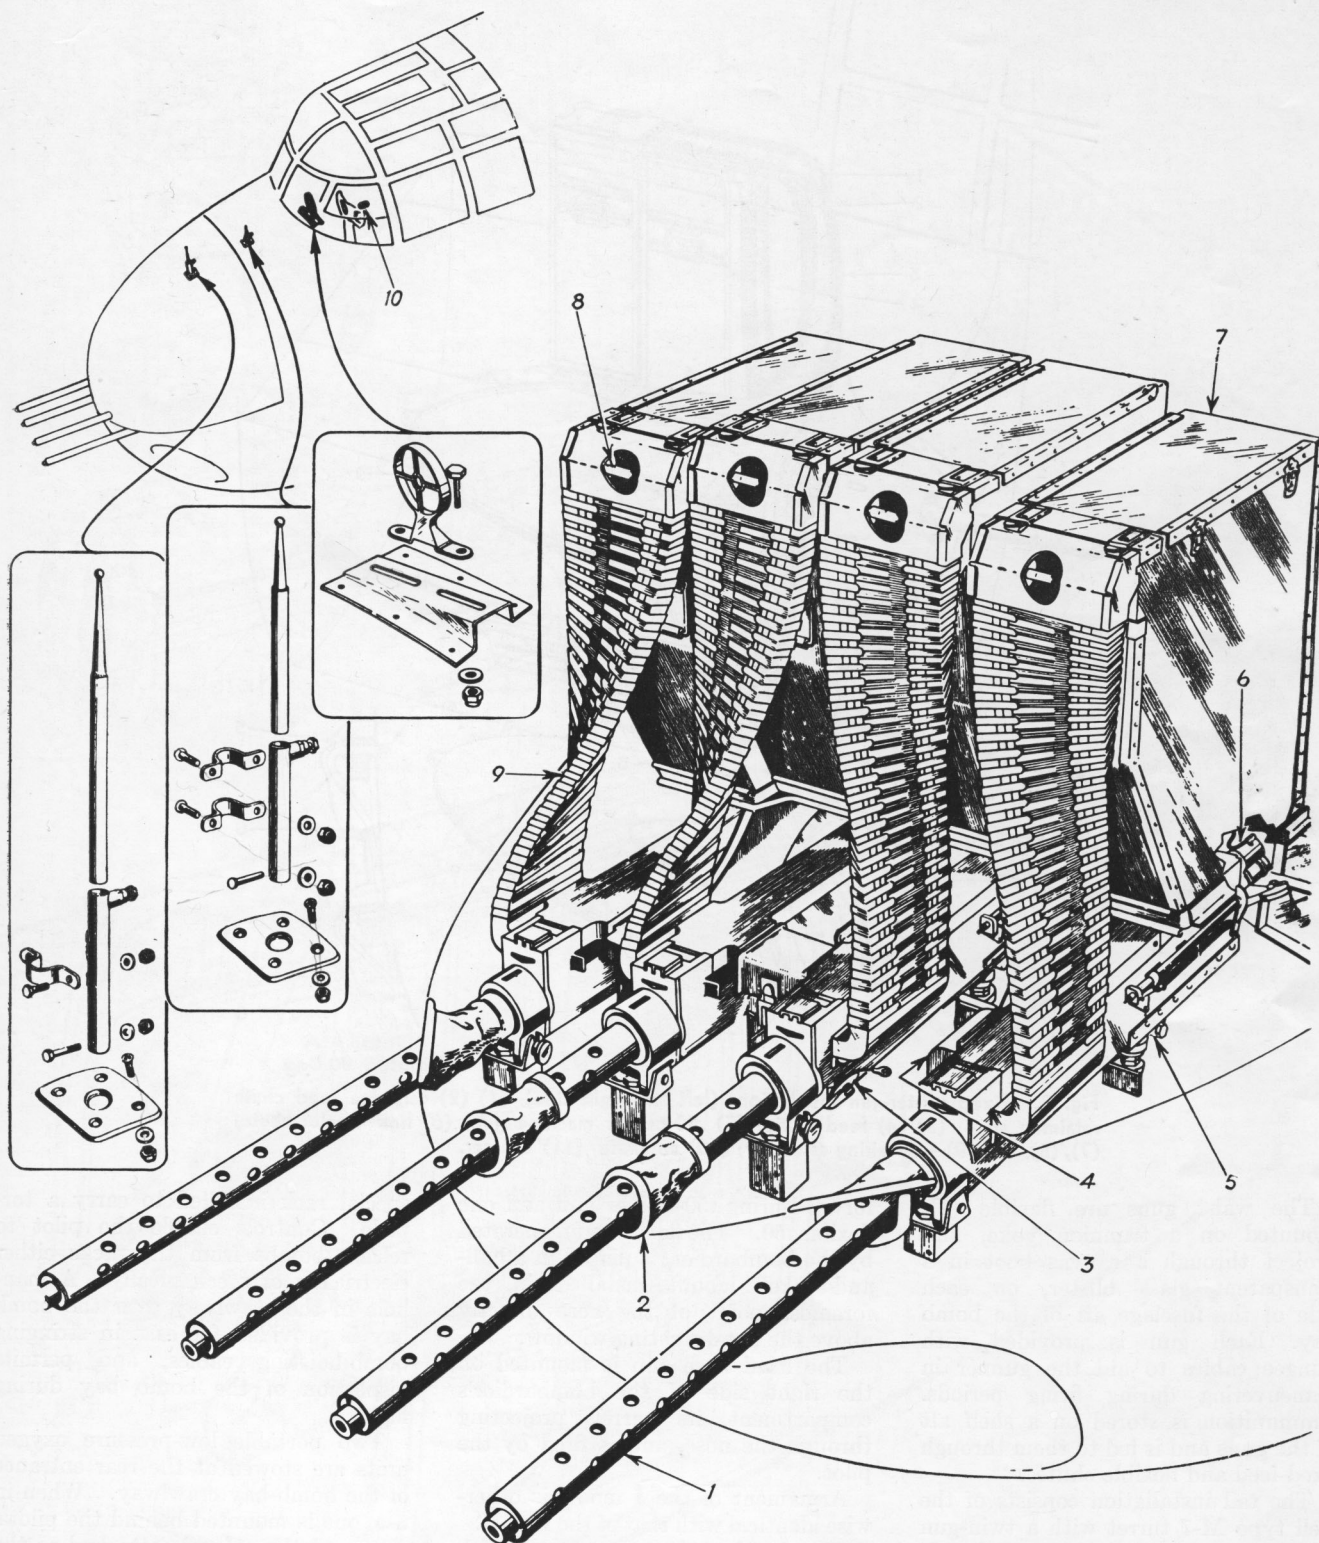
Shown here is the B-25H installation of four nose guns: (1) .50-caliber machine gun; (2) gun cover; (3) gun charger pulley bracket; (4) chute; (5) post assembly; (6) solenoid; (7) ammunition box; (8) roller; (9) ammunition feed chute; (10) trigger switch. The insets show ring and bead sight components.
